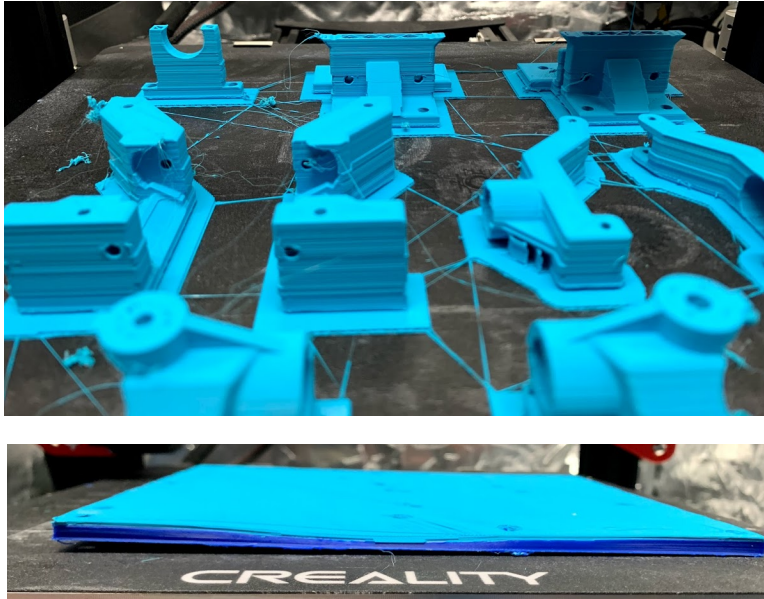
Example of Print Defects, Layer Shifting (Top) and Warping (Bottom)
